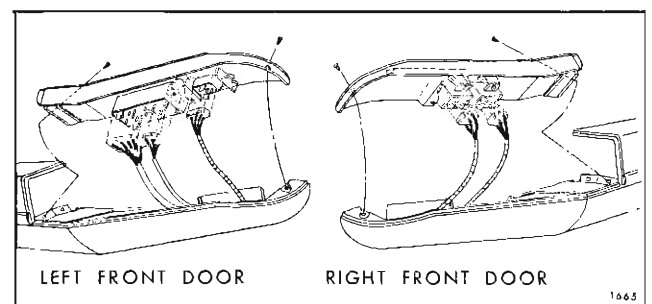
D14—Front Door Arm Rest Switch Cover Assembly
